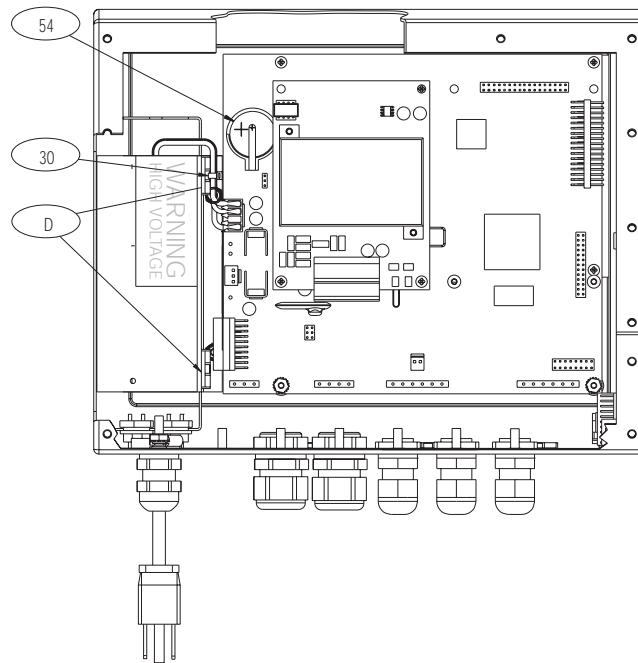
920i Universal Model, Back View with Backplate Removed
